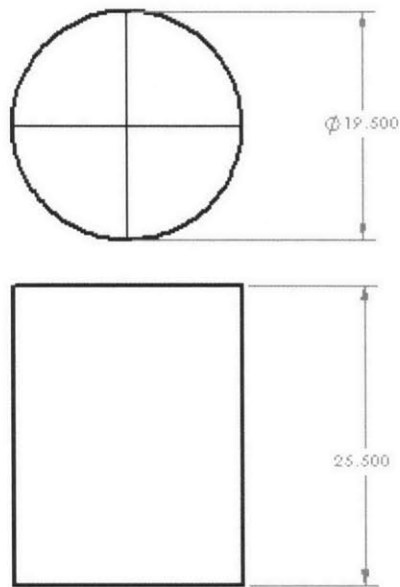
Top and Front view of the cylindrical beaker used as the test bath (dimensions in cm)
